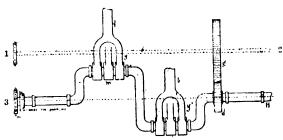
1. Sprocket-working Lubricator; 2. Cam Shaft; 3. Sprocket-working Pump.
